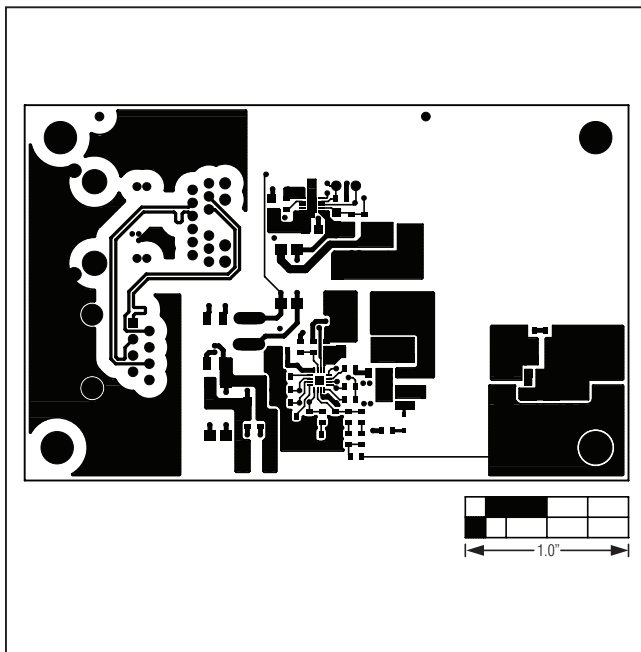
MAX5974E EV Kit PCB Layout—Component Side
